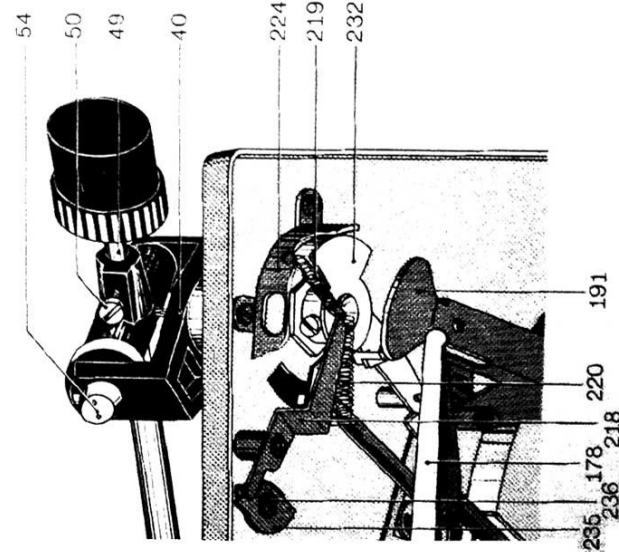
Tonearm bearing assembly with anti-skating adjustment
